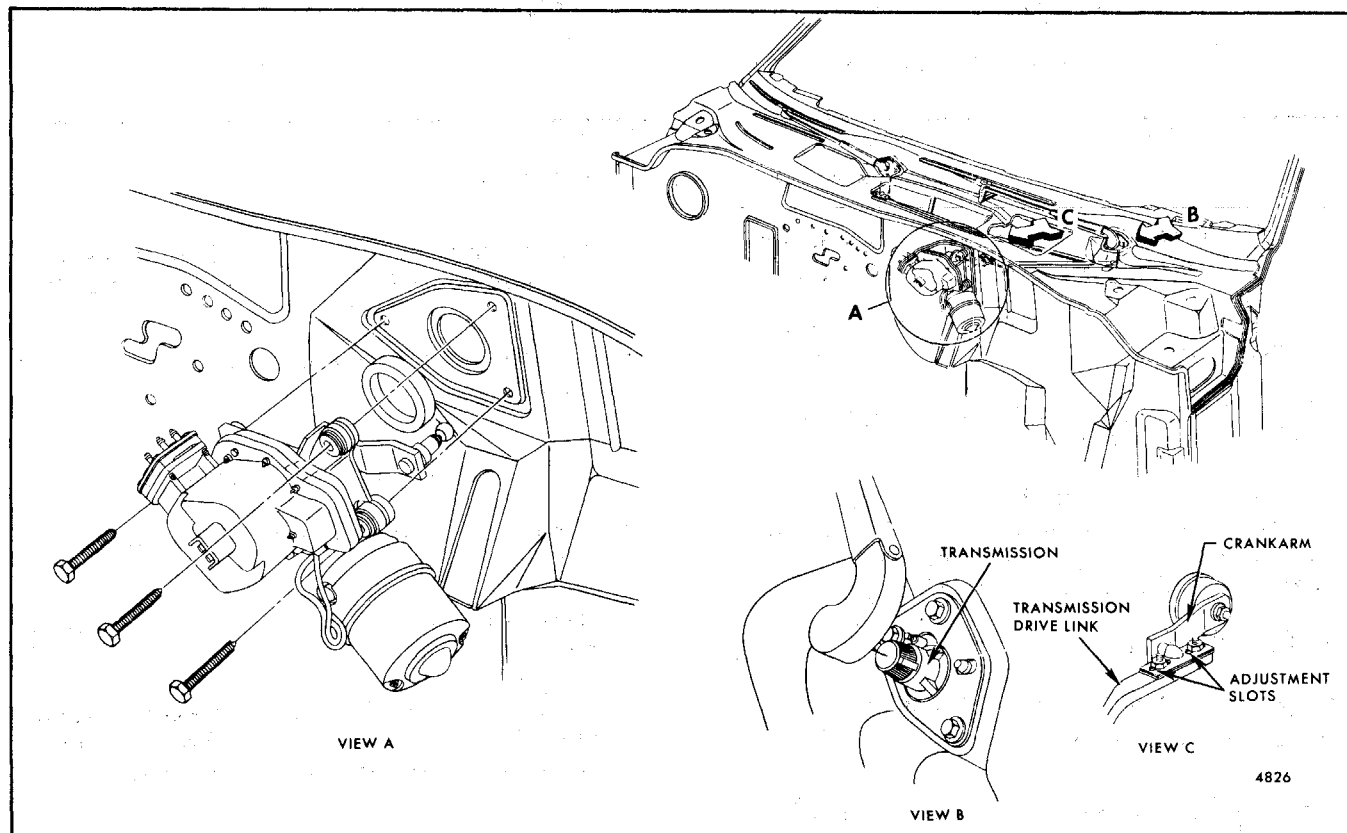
Round Motor Installation "A" Styles ("F" Styles Similar)
